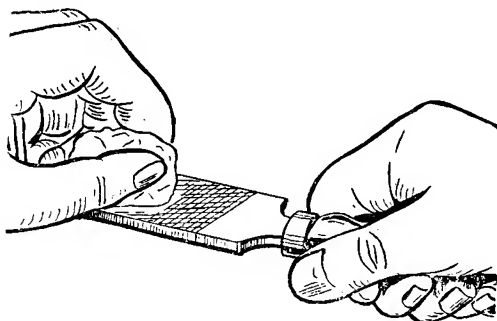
For producing shapes in thick sheet metal, first drill and then finish with a file
